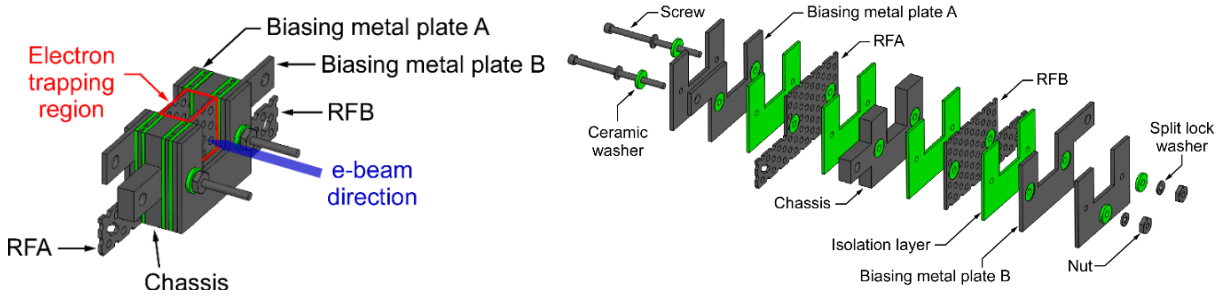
Schematic and exploded view of electron trapping module (ETM).
